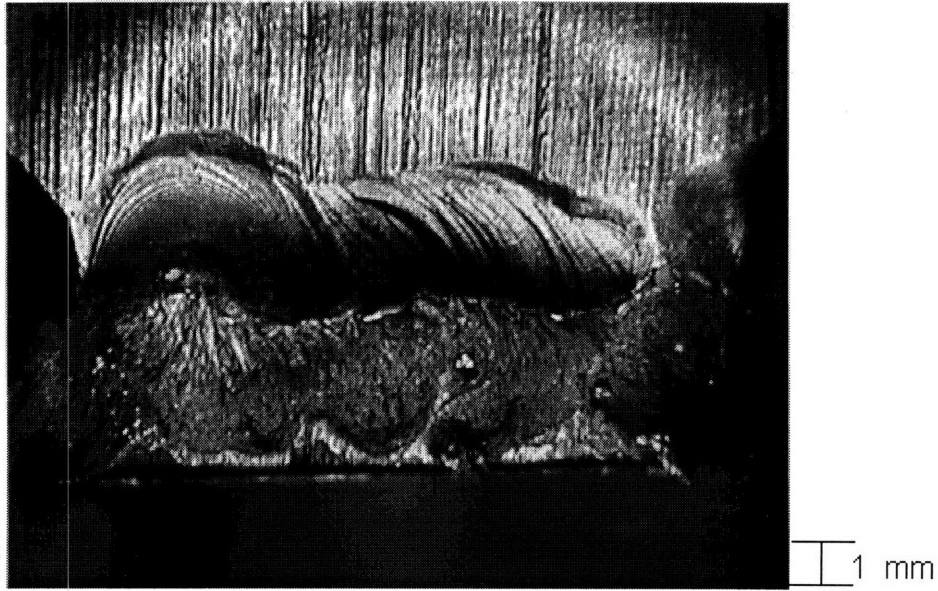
General view of specimen 3 weld fractured surface.
